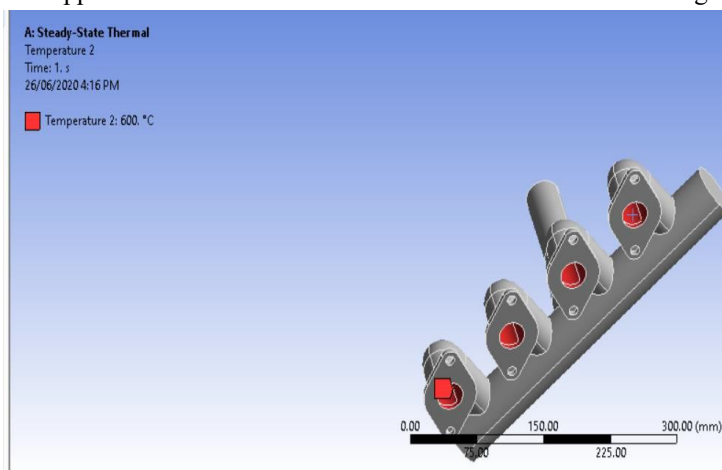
Exhaust gas temperature is applied to the internal surface of the exhaust manifold
